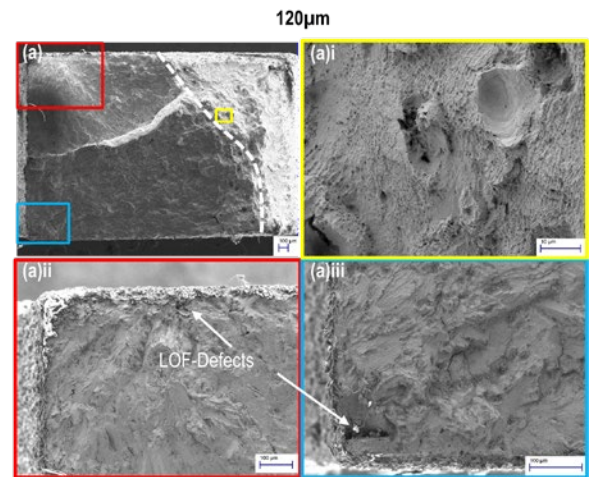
Scanning electron microscopy image depicting the fracture surface of a fatigued specimen fabricated utilizing a layer thickness of 120 μm
